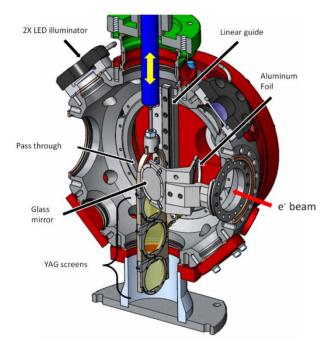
Isometric cross section of vacuum chamber showing internal components.
